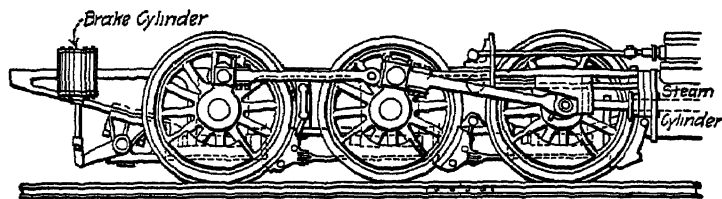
DRIVING WHEELS, MAIN AND SIDE RODS, CROSSHEAD, GUIDES, PISTON ROD, VALVE ROD, AND BRAKE GEAR OF A LOCOMOTIVE
